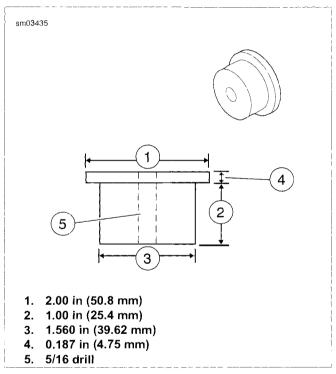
Pinion Shaft Outer Race Installation Tool
